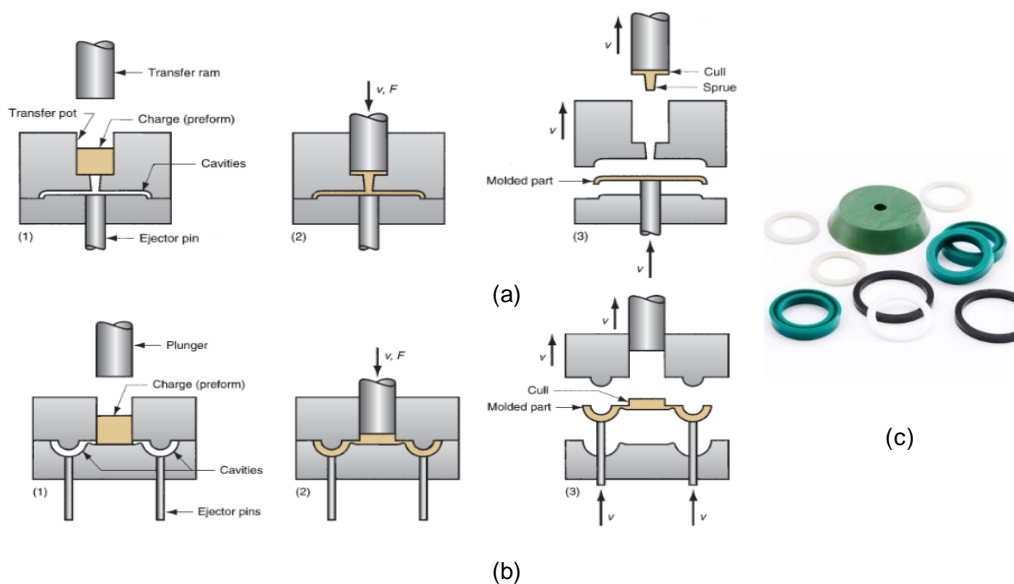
Simplified diagrams of transfer molding: (a) pot transfer molding (b) plunger transfer molding (Groover, 2013) (c) example of a parts produced by this process (Archer Advanced Rubber, n.d.)
